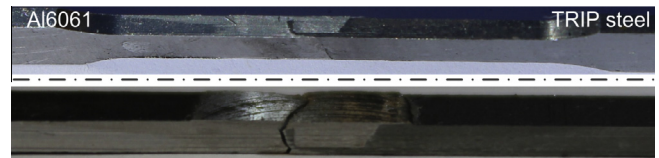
Tensile specimen fractured along the interface between the outside boundary of the stirred over steel strip and aluminum matrix (process conditions: rotational speed of 1800 rpm; welding speed of 120 mm/min; tool offset of 1.03 mm).
